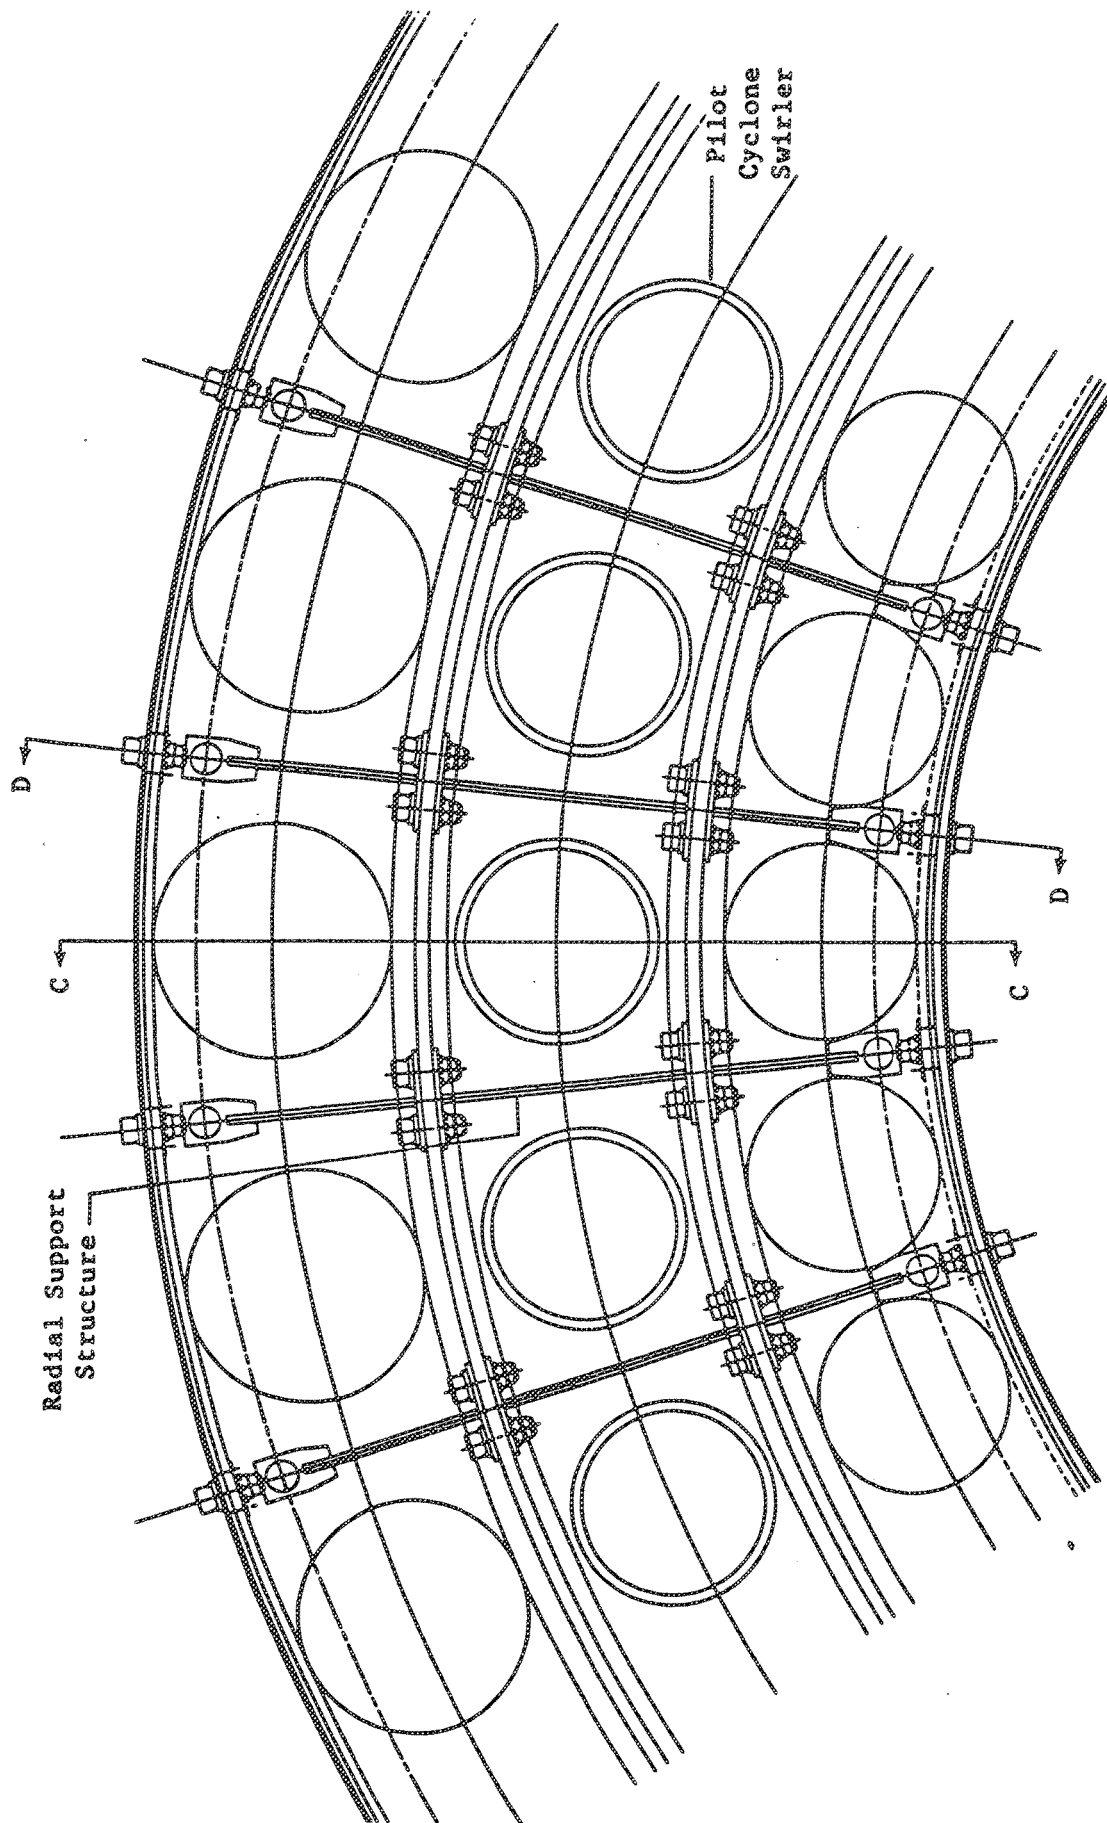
Mechanical Design Swirl-Jet Combustor (FLA).
